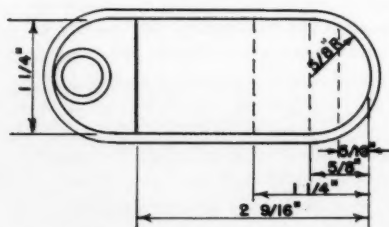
End view of erosion controller showing dimensions, details of construction, and operating position
